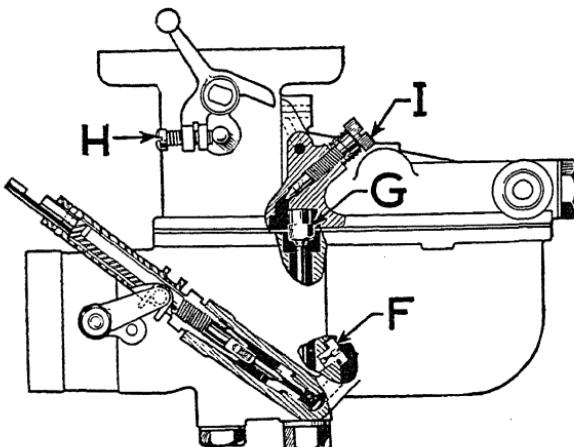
Adjustments on Ford Model "A" Car Carburetor
